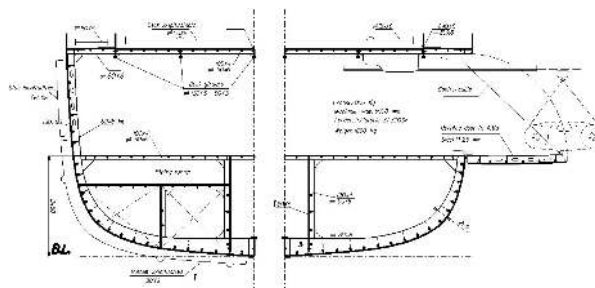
Main section of a 60 m steel yacht with intermediate deck and side door.
